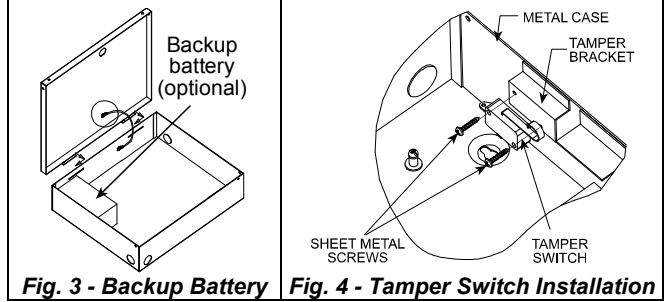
Backup Battery Fig. 4 - Tamper Switch Installation
